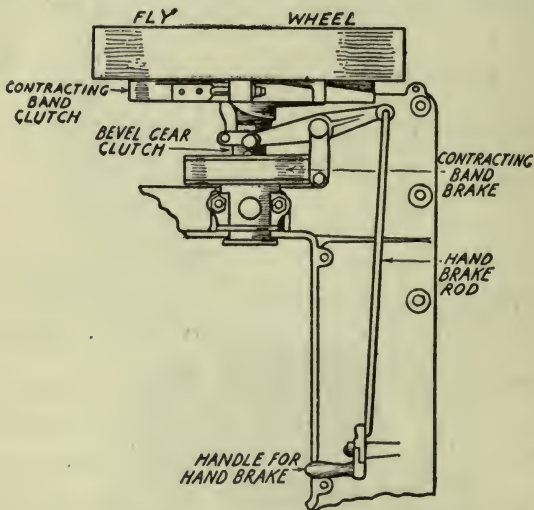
B.—CLUTCH STEERING GEAR OF A HOLT-CATERPILLAR 40-60
